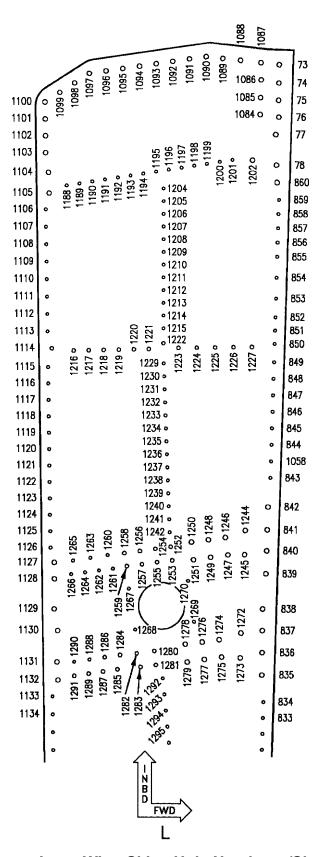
Inner Wing Skins Hole Numbers (Sheet 7)
